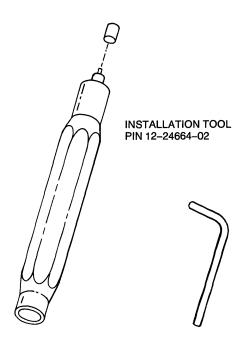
Transceiver Installation Kit Parts (Sheet 1 of 2)
